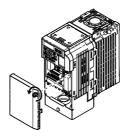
Remove the Front Cover on a NEMA Type 1 Drive
